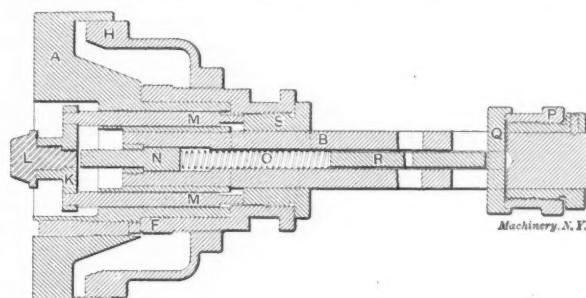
Section on Line y-y of Fig. 2, showing Reaming Mechanism
